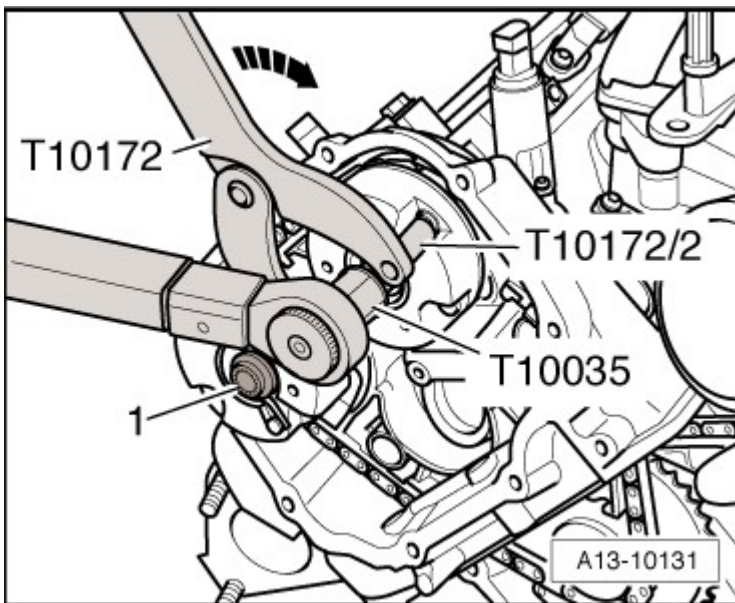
Removing/ Installing Left Camshaft Adjuster
